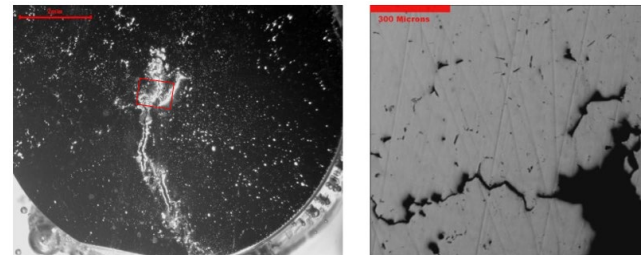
B206 with cracking at the interface and through the weld.
